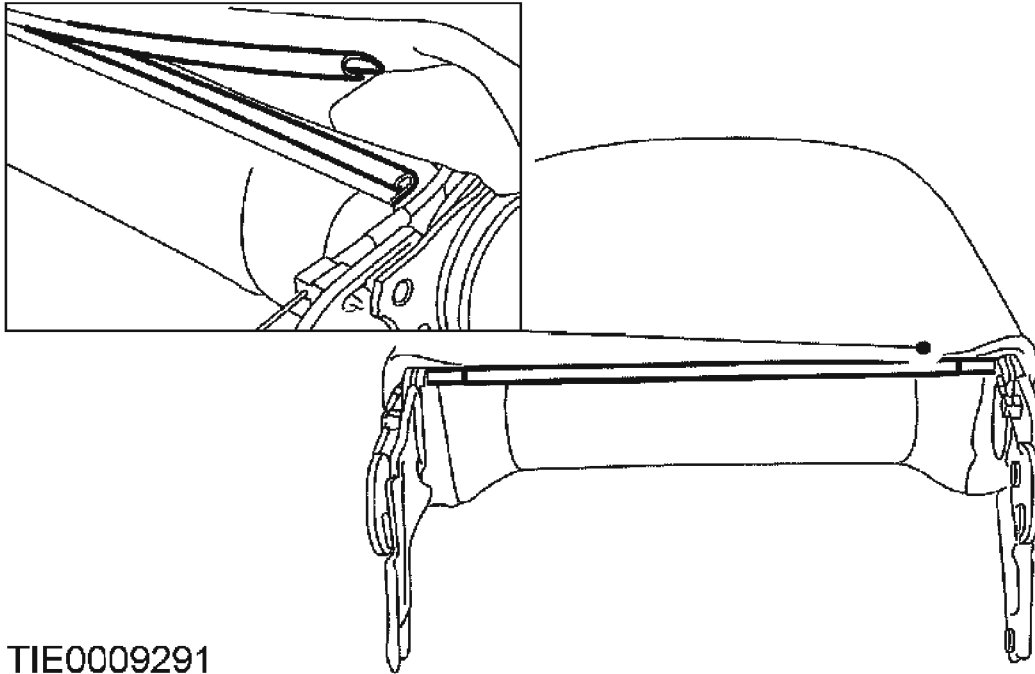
Attaching Lower Ends Of Tensioning Rods To Backrest Foam Pad
